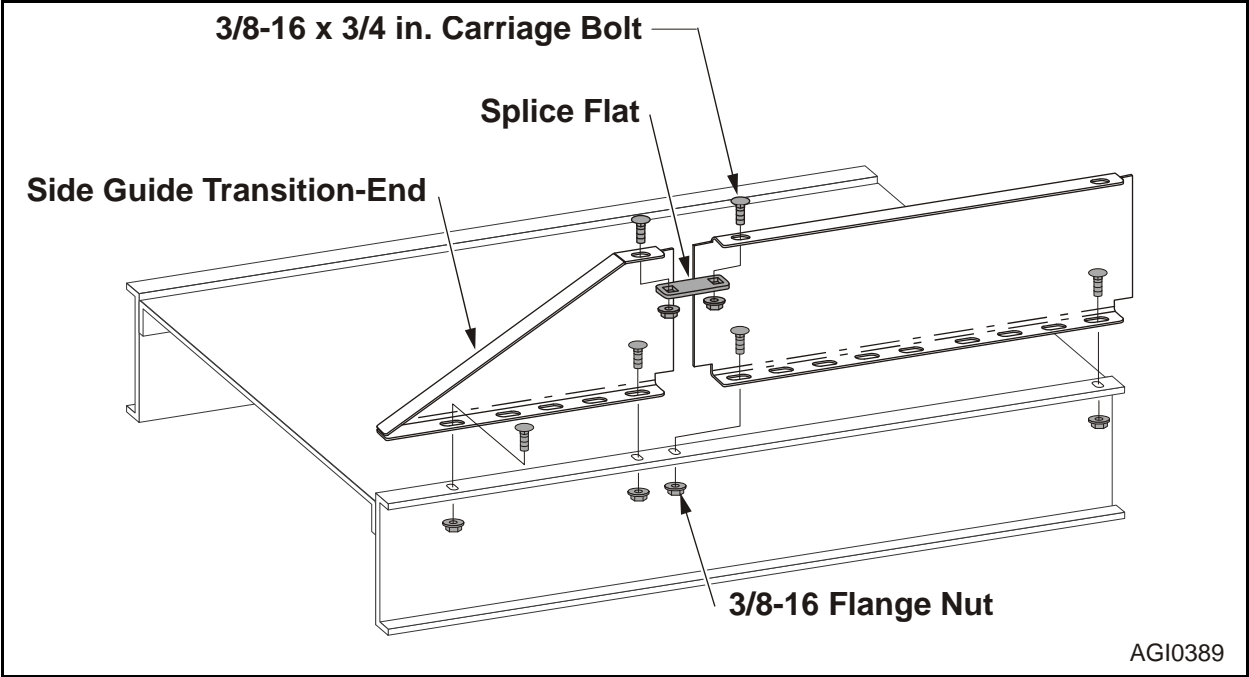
77 Direct-Mounting Side Guide Transition - Ends
